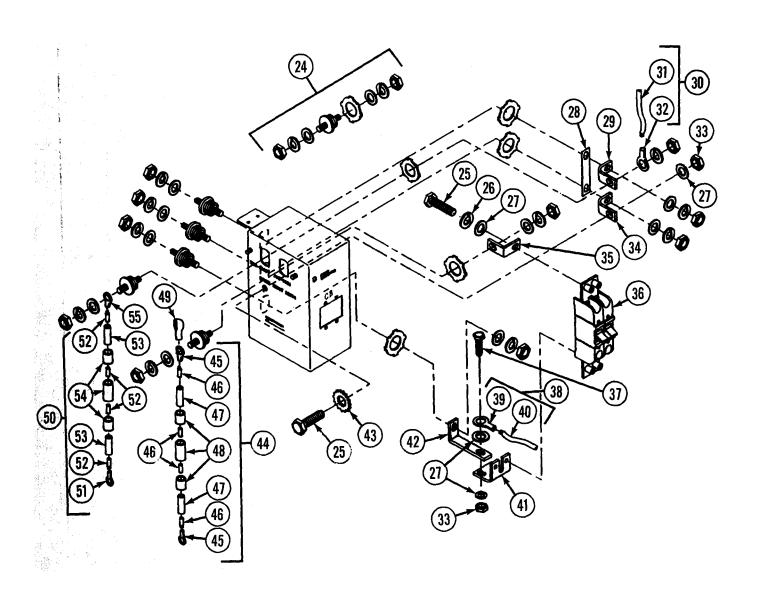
Power Interface Box Assembly (sheet 2 of 2)
